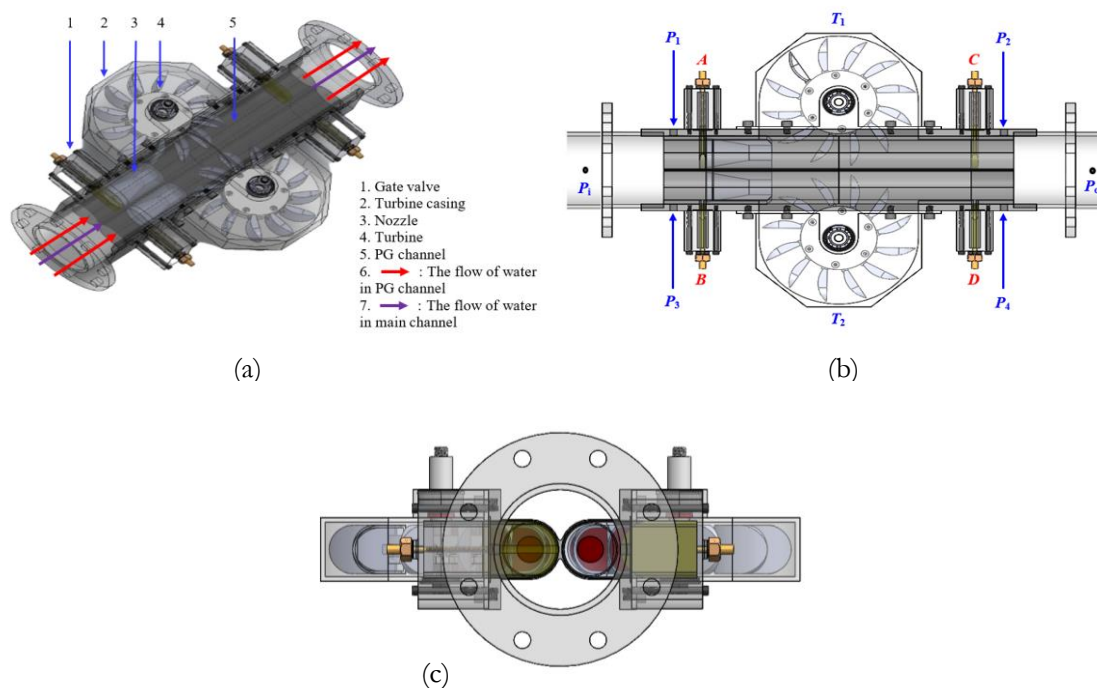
Schematic diagram of P40: (a) the 3D views. (b) the top view with pressure point (P_i , $P_1 - P_4$, P_o) and turbine locations (T_1 : Turbine 1, T_2 : Turbine 2). and (c) the front view (valve opened on the right and closed on the left PG channel)
